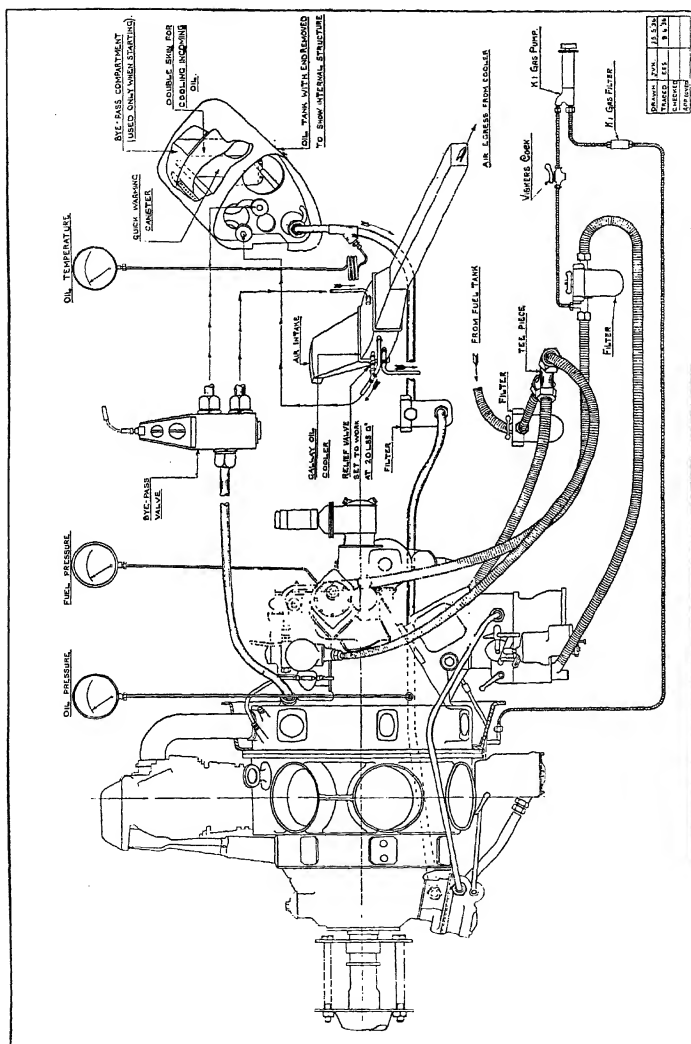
OIL AND FUEL SYSTEM COMPONENTS AND THEIR CONNECTION TO ENGINE.
